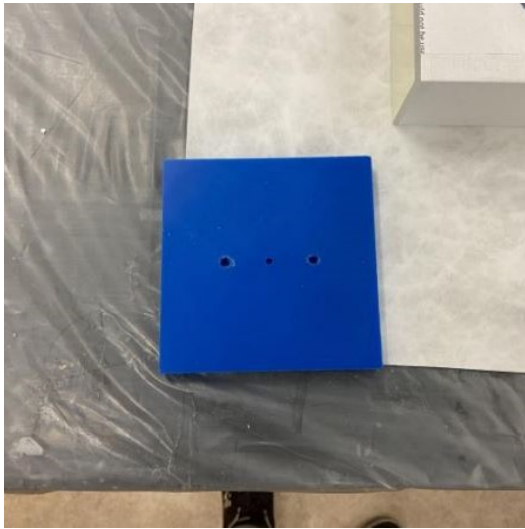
3D-printed mold used to drill holes at one end of the scintillator units.
